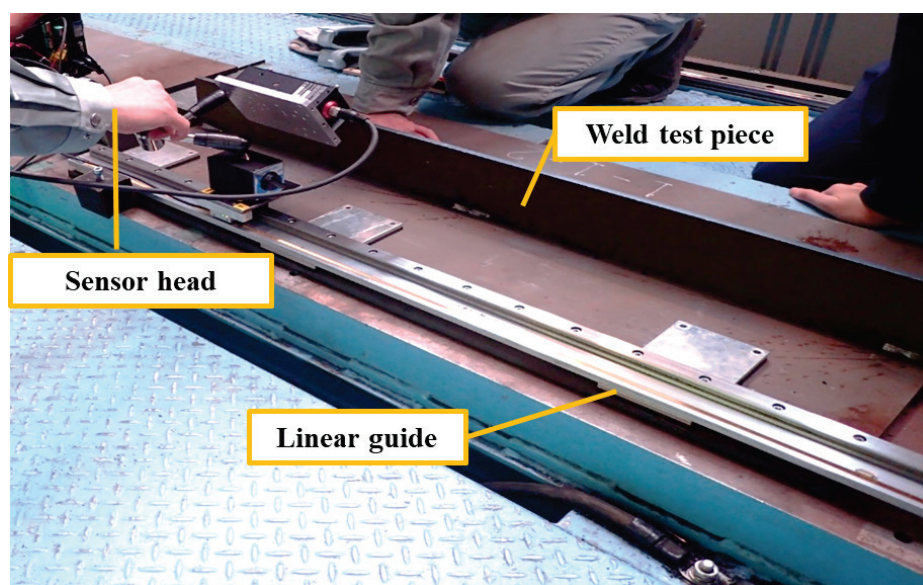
View of 3D coordinate measurement of weld bead shape
